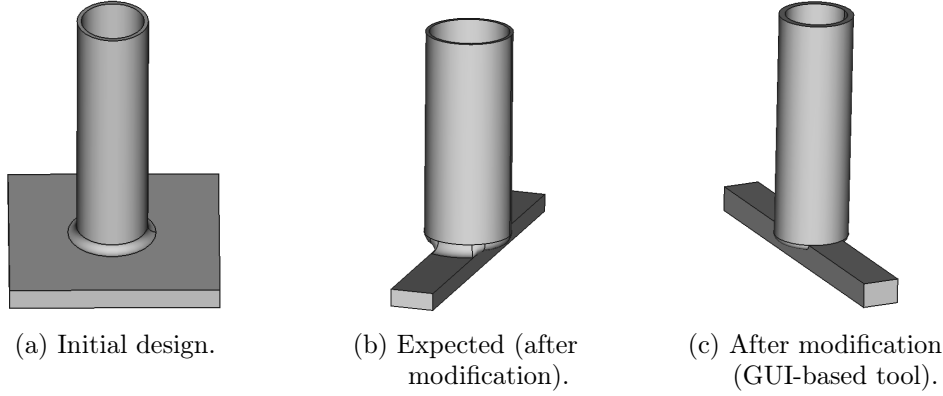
A simple design consisting of a hollow tube mounted on top of a rectangular base with the mounting edge filleted (smoothed). When this design is modified (base is made narrower), we expect all edges connecting the tube and the base to continue to be filleted. However, we get a different (unexpected) result.
